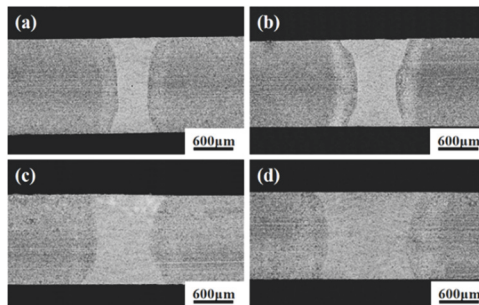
Cross-sectional morphology of the weld joint after press hardening: (a) 3 kW; (b) 4 kW; (c) 5 kW; (d) 6 kW.
